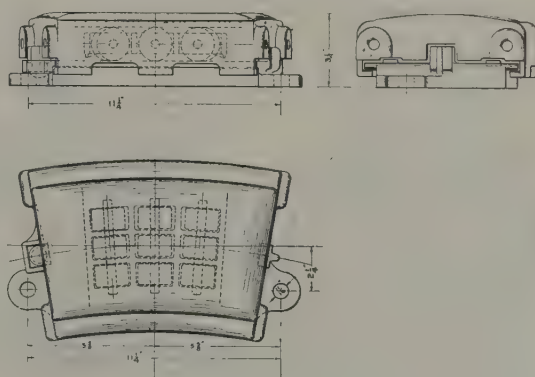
Creco Covered Roller Side Bearing for Four-Wheel Passenger Train Car Trucks.
